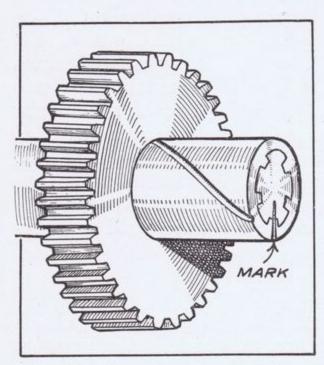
Showing how the Steel Bush and Shaft should be marked before Dismantling to ensure that they can be reassembled Correctly.
